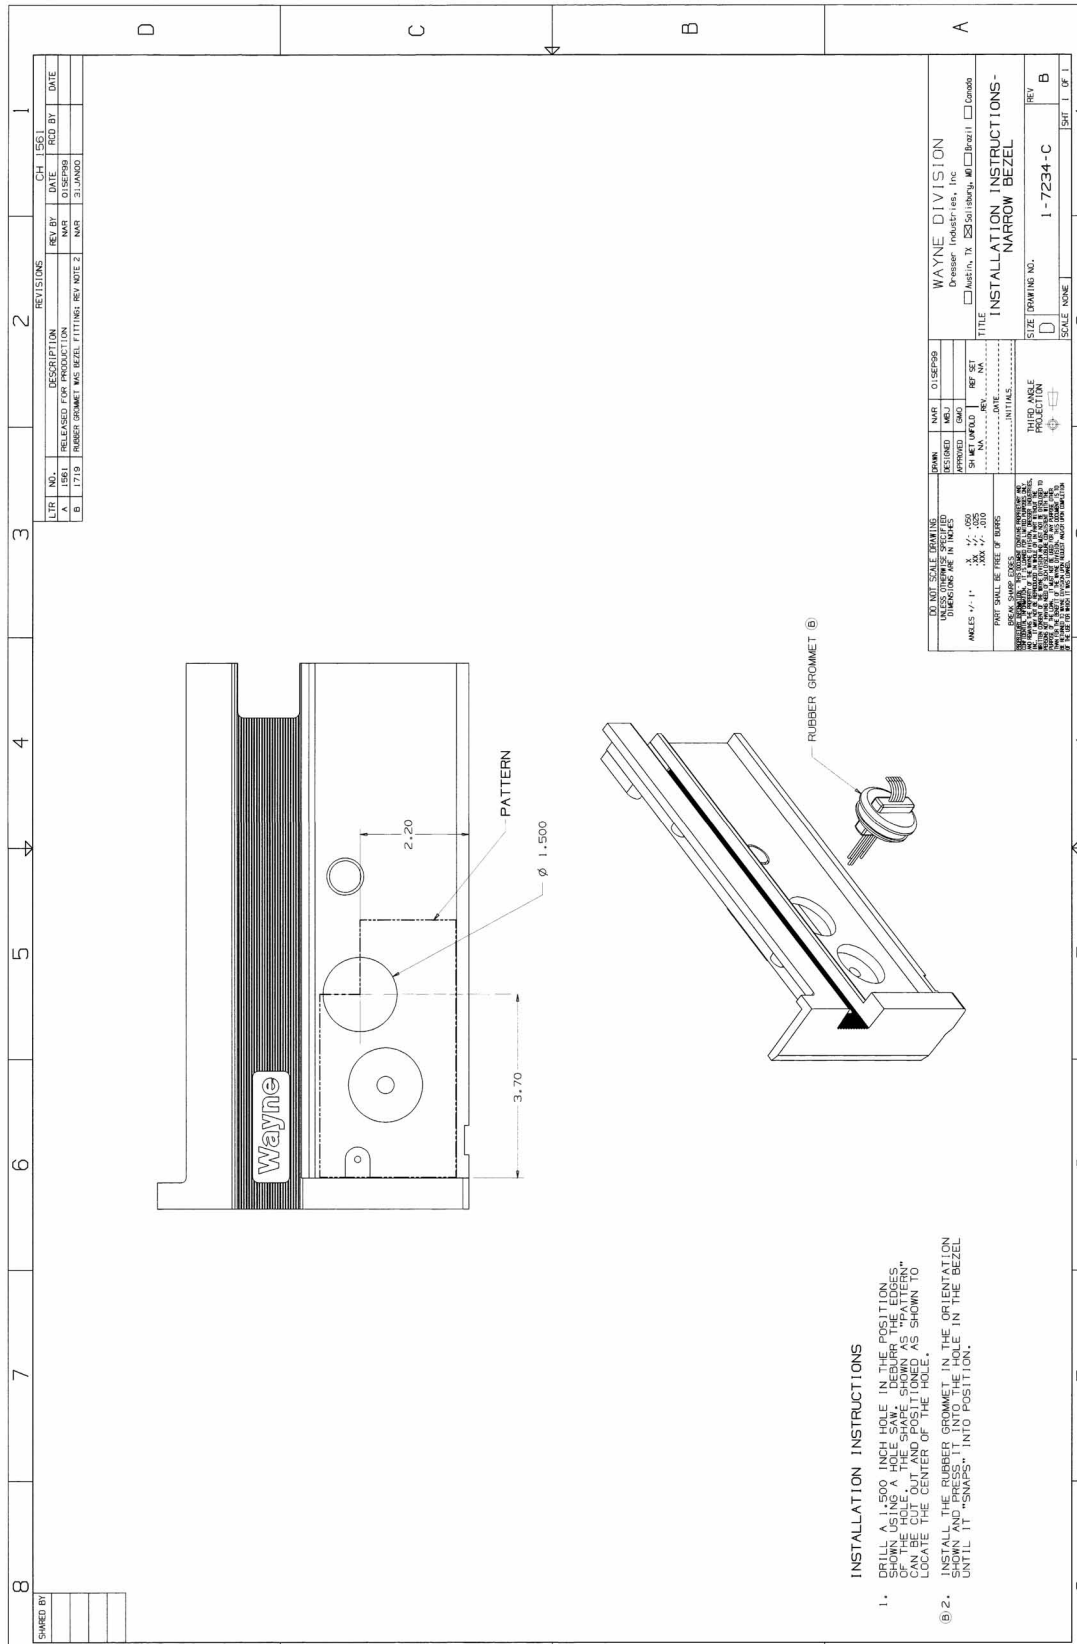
1-7234-C INSTALLATION INSTRUCTIONS - NARROW BEZEL
